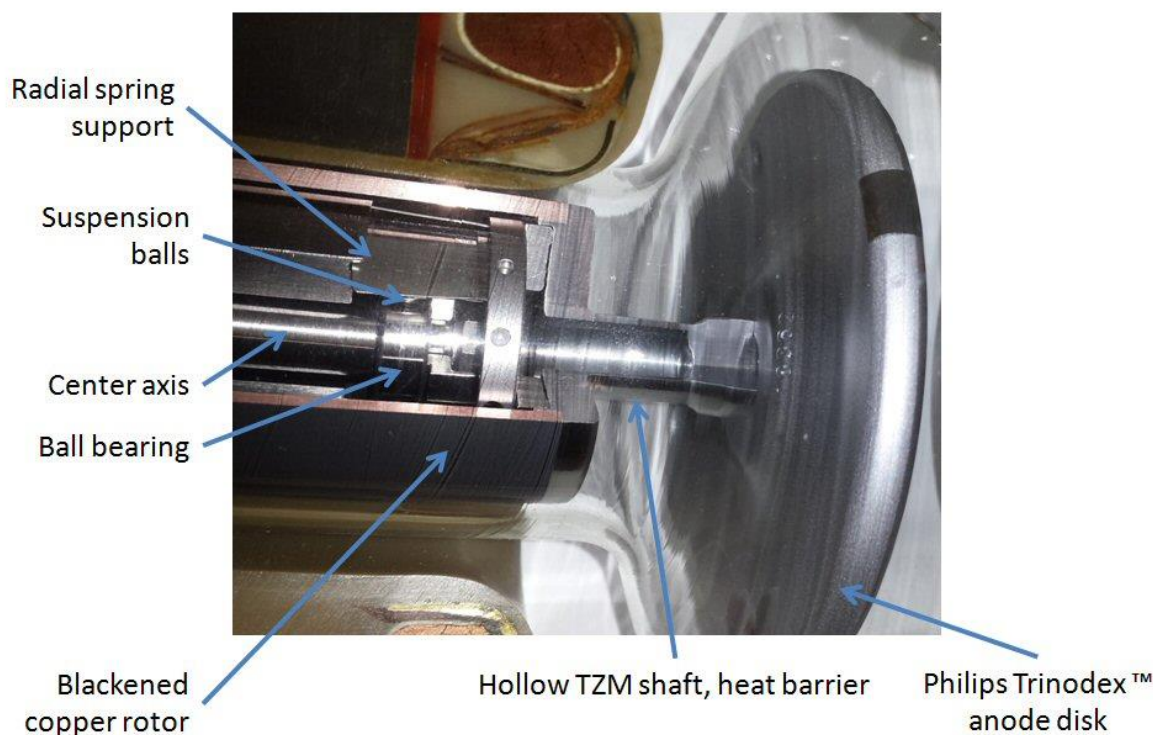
Low noise radial spring supported ball bearing system in a Philips glass tube.
